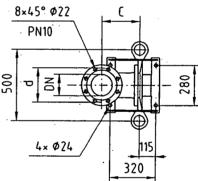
DN 150 and DN 150/200 guide rail system installation dimensions. The variable dimensions are given in table
